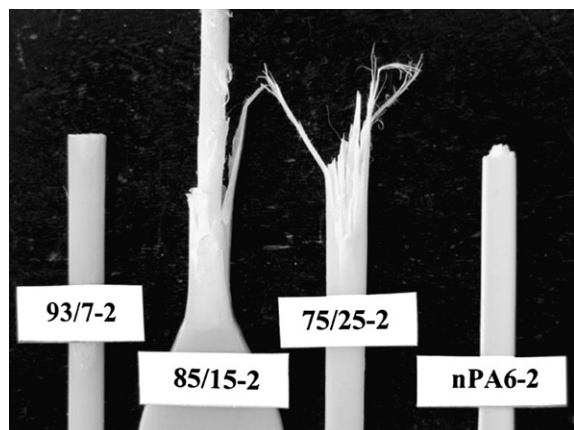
Photograph of the fractured PC/nPA6-2 NC's tensile specimens.
